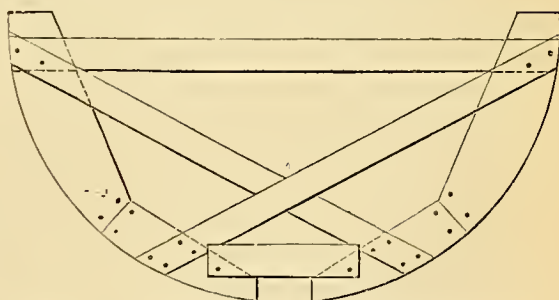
MOULD OF SECTION OF BOAT IN ONE INCH DEAL.
